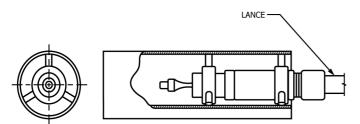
For 50 mm to 125 mm (Approximately 2 in. to 5 in.) Inside Diameter Pipe
